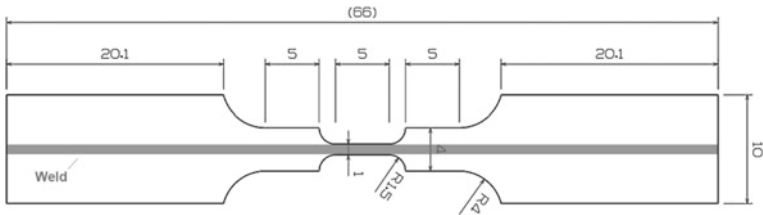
Mini-tensile specimen for weld metals (unit: mm)
